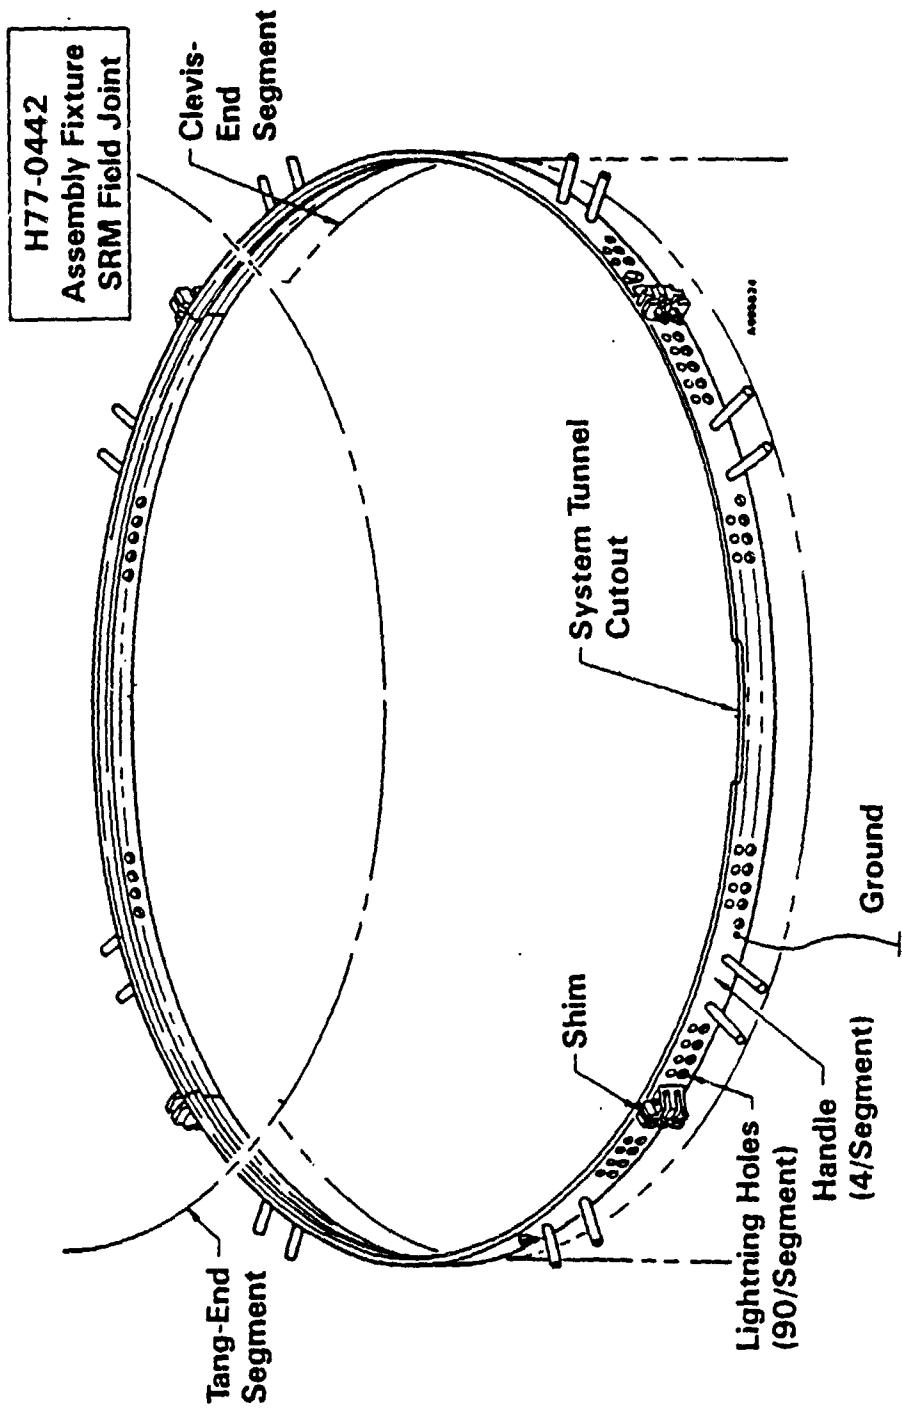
Field Joint Assembly Fixture (FJAF)
